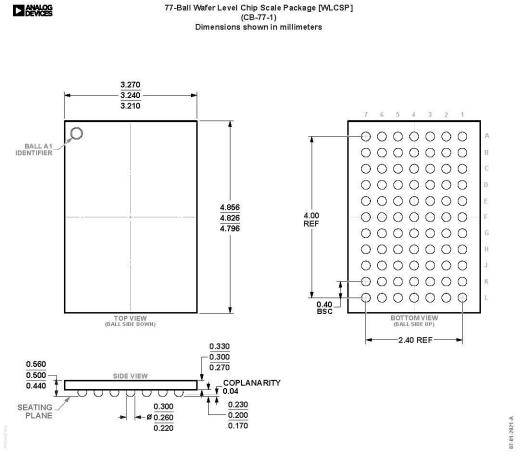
77-Ball Wafer Level Chip Scale Package [WLCSP] (CB-77-1) Dimensions Shown in Millimeters
